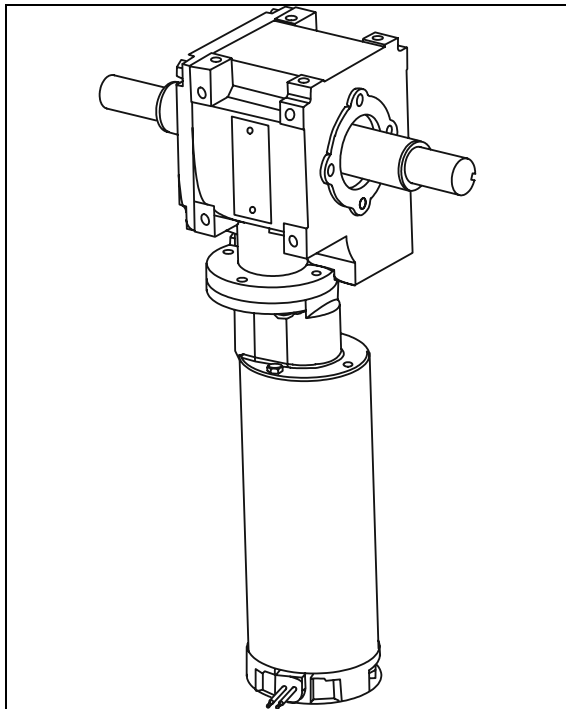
ELECTRIC MOTOR AND SPEED REDUCTION GEARBOX
